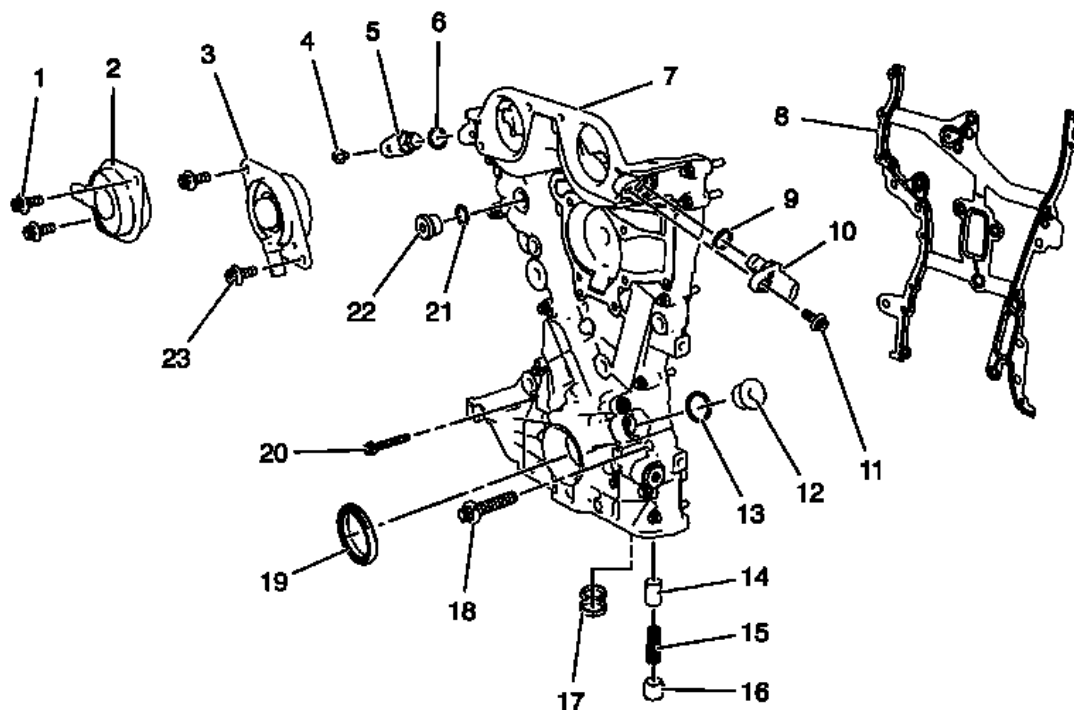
Engine Front Cover And Oil Pump Assembly (1 of 2)
